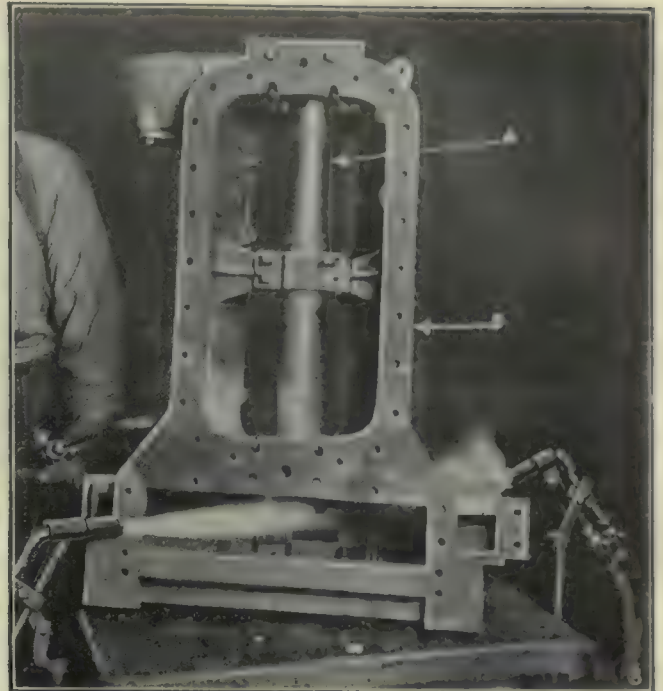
PRE-HEATING A CRANKCASE BEFORE WELDING
